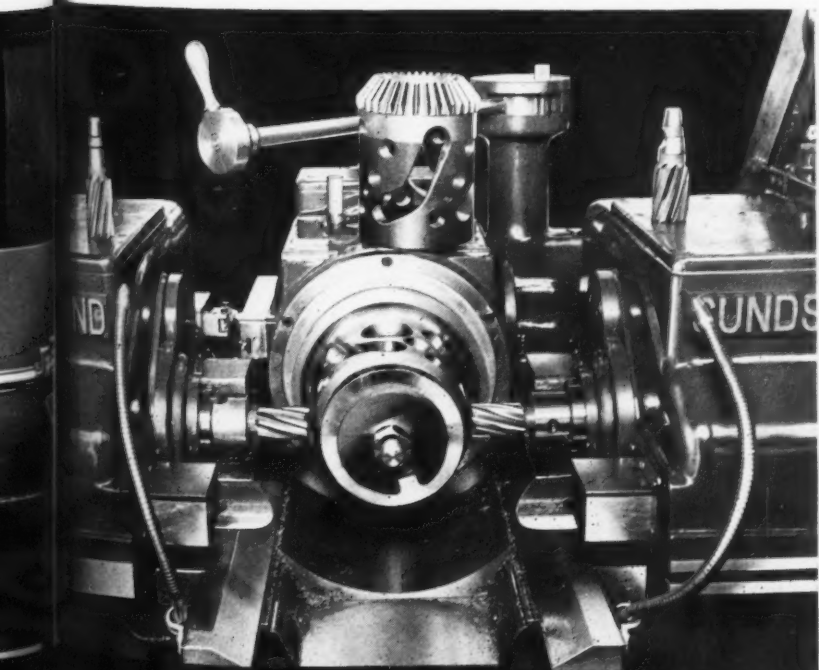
Machine Employed for Broaching the Inner Edge of Eight Holes in Gear Segments to Form Slots
